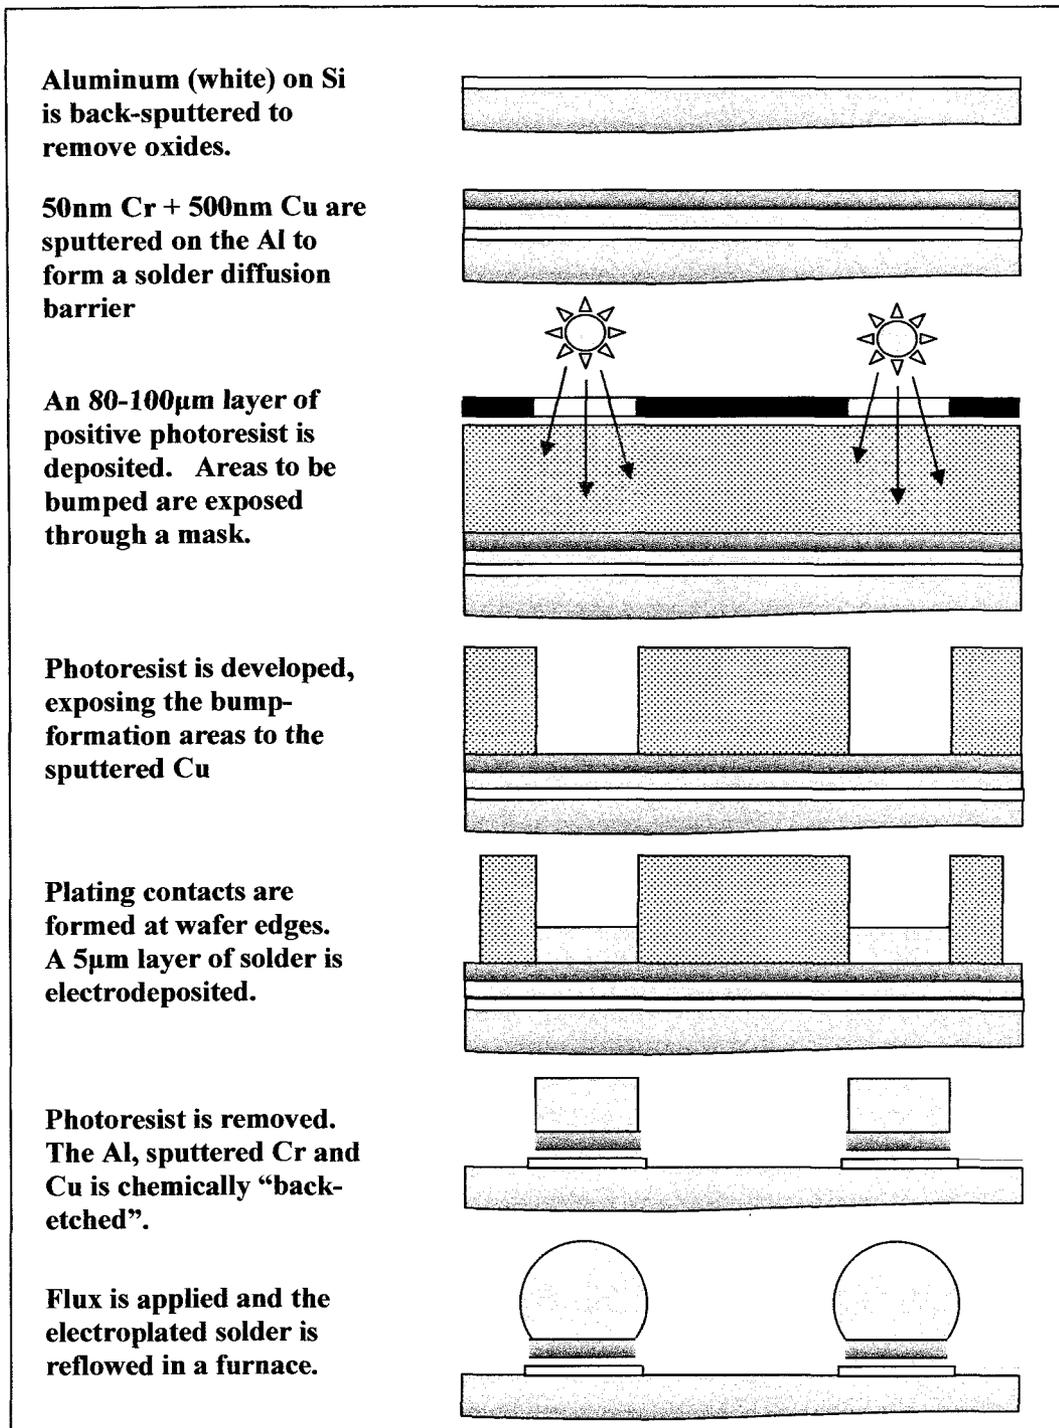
Method of Sn-Cu solder bump deposition on metallized Si IC's. Drawing is based on descriptions in [Karim & Schetty 2000].
